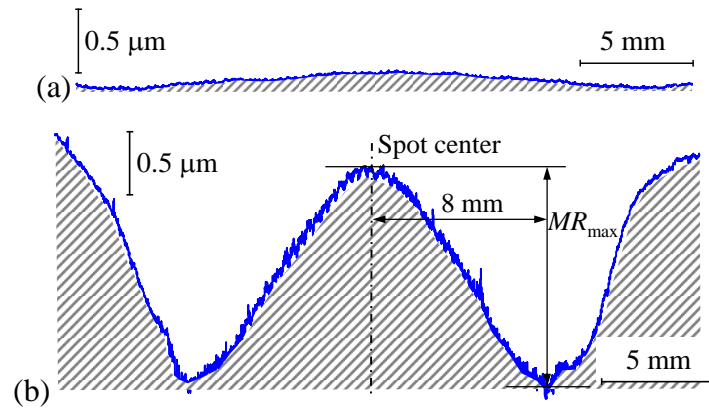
Cross-sectional profiles of workpiece along x/y -axis after (a) SCDT and (b) spot polishing for 75 min
